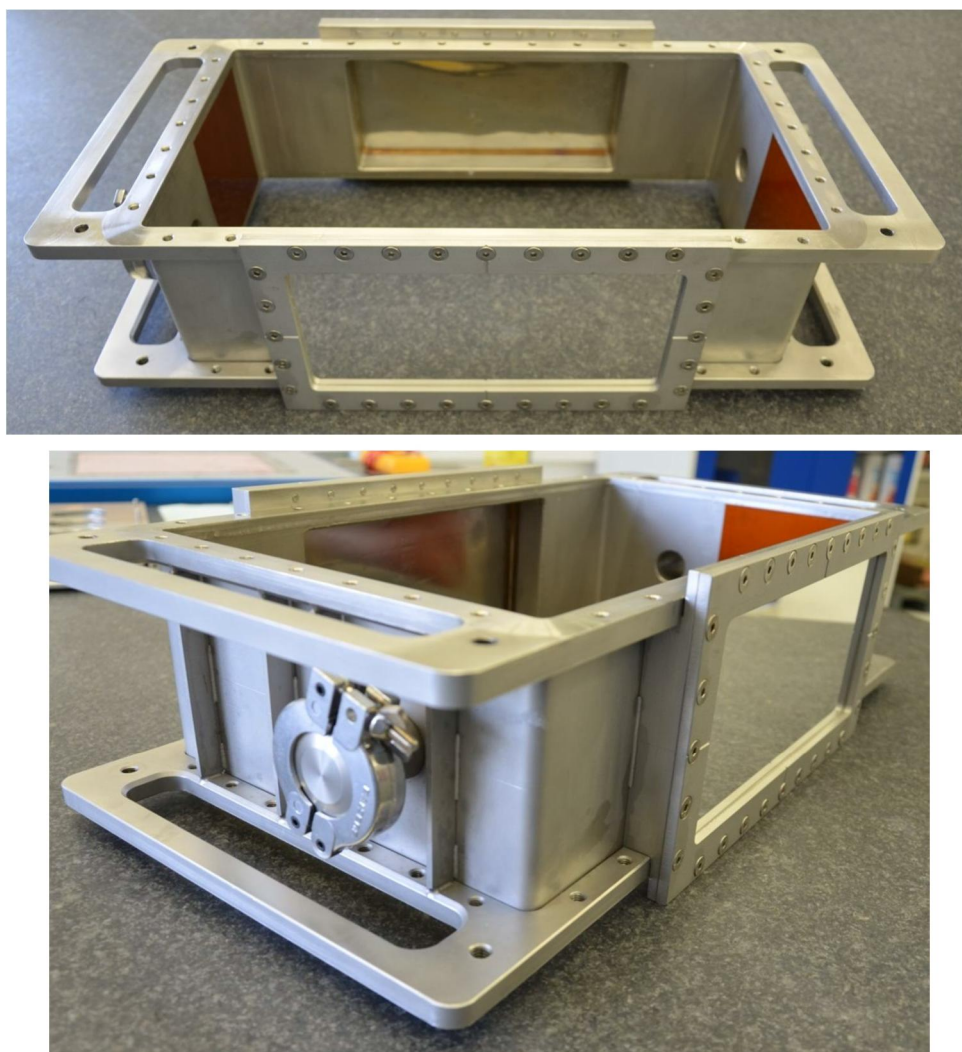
Housing made from stainless steel in a welding-type construction. The KF-type exhausts can be used to evacuate the vessel enforcing out-gassing of the detector materials installed inside in order to achieve better gas-purity.
